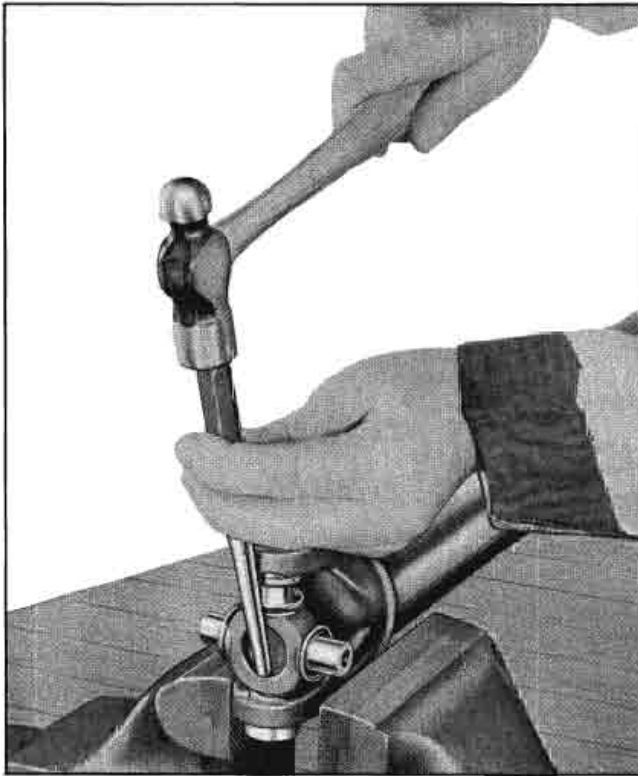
A-7 Removing Bearing From Fixed Yoke Member
